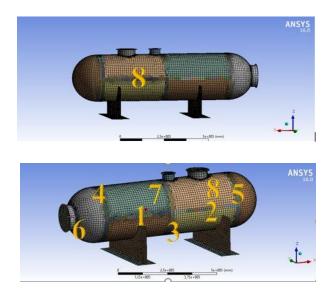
The order of welding on the structure of pressure vessel
